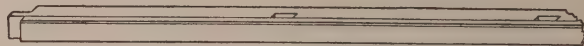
Top Rail (Side) Mortised and Tenoned (Reverse Way Up)
